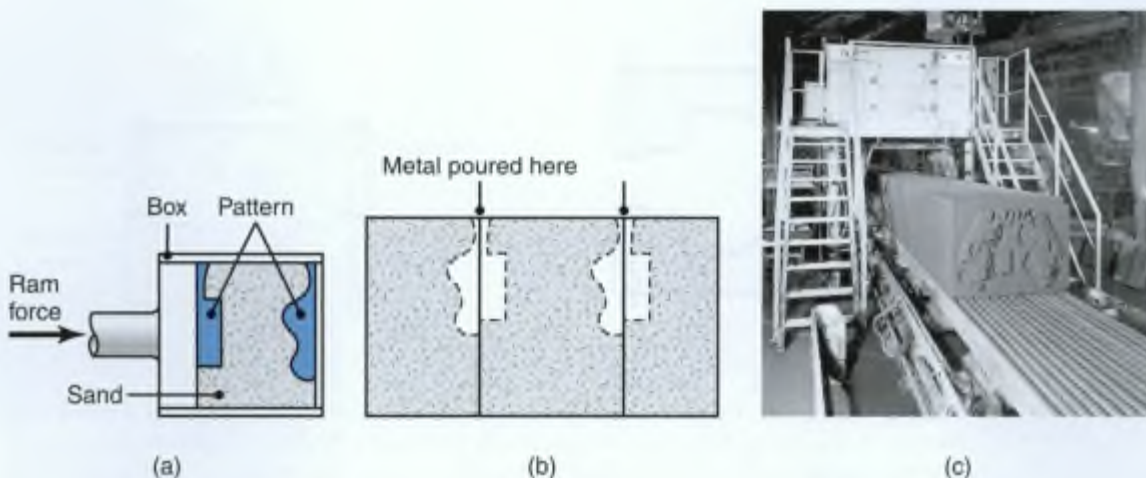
Vertical flaskless molding. (a) Sand is squeezed between two halves of the pattern. (b) Assembled molds pass along an assembly line for pouring. (c) A photograph of a vertical flaskless molding line. Source: Courtesy of American Foundry Society.
